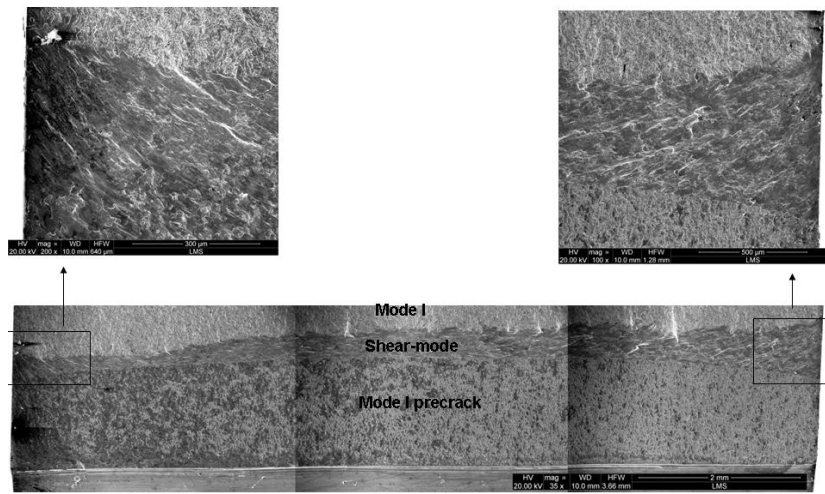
Fracture surfaces of specimen n°10 ( $\alpha=90^\circ$ )
